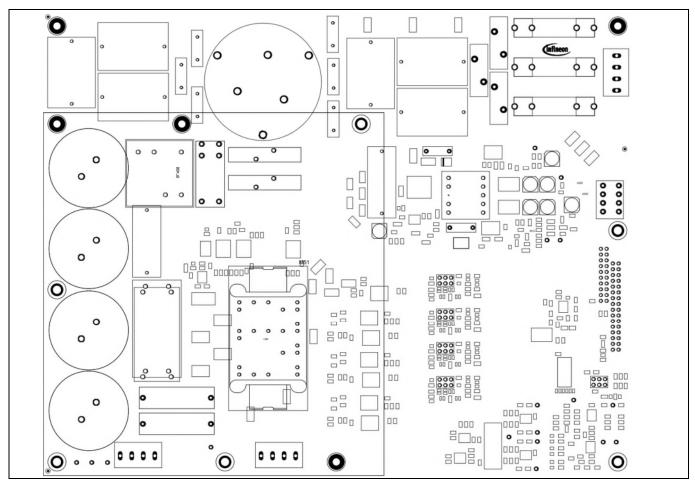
Bottom assembly print of the EVAL-FS33MR12W1M1HM5 evaluation board
